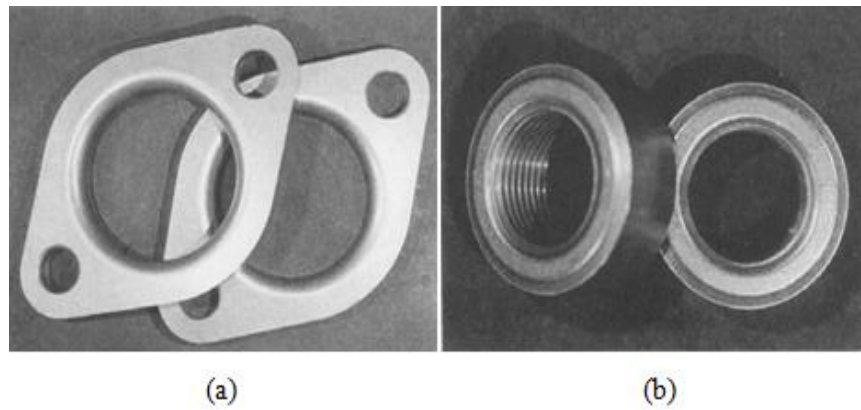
Wrought steel (a) flanges and (b) sensor rings using for sealing within of structural parts [46].
